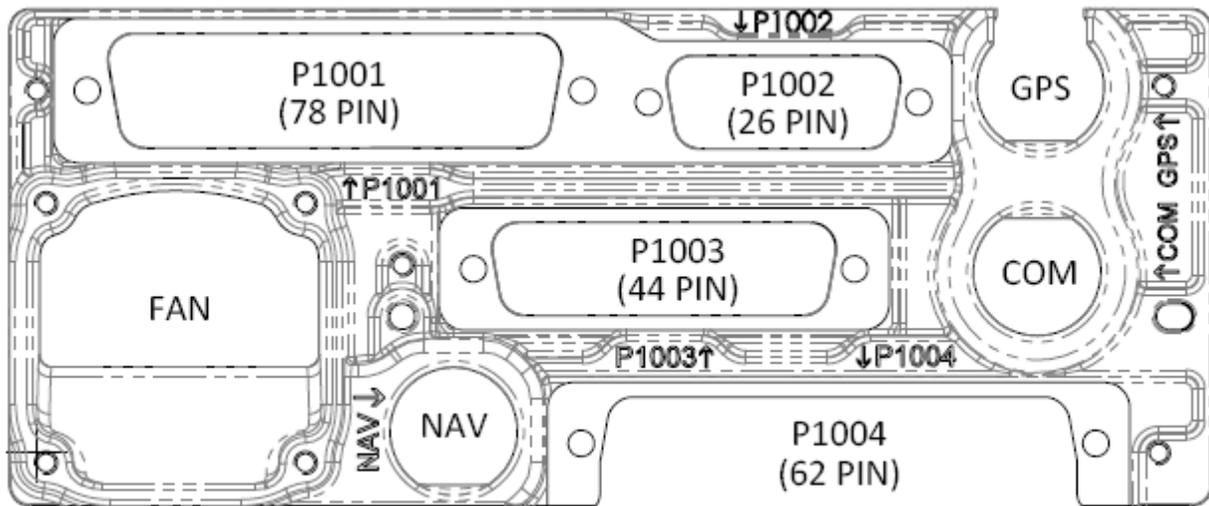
GTN 6XX Connector Layout Detail—Rear View
